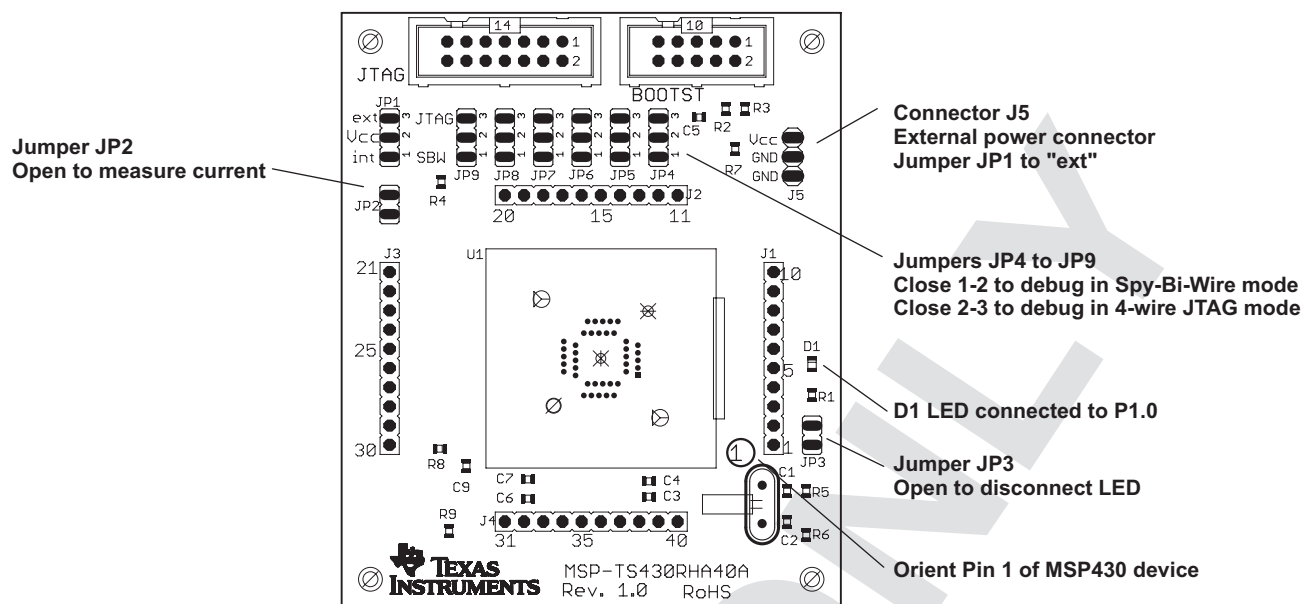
MSP-TS430RHA40A Target Socket Module, PCB
